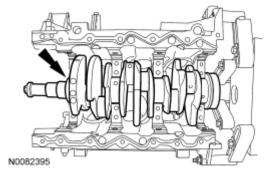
Locating Crankshaft Courtesy of FORD MOTOR CO.
